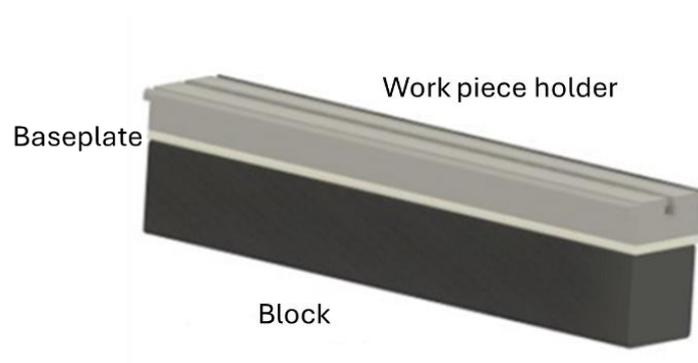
Schematic drawing of the slicing assembly: Monocrystalline silicon block glued on a baseplate, which is glued on a work piece holder
